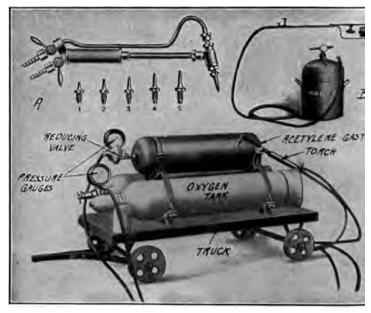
Torch for Autogenous Welding and Tips for Same at A. heating Torch at B. Portable Welding Outfit on Wheeled! Shown at Bottom of the Illustration.
